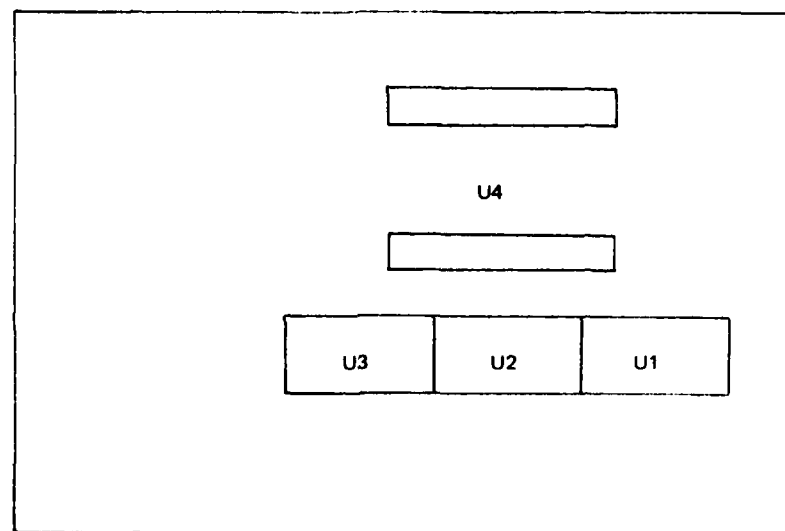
74S481 Test Circuit Board Outline Drawing
